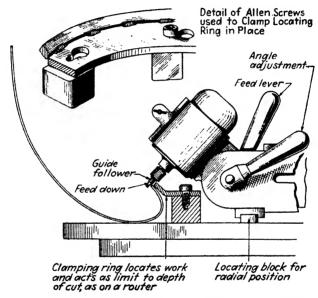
Motor-driven profiler for trimming airplane cowlings.
